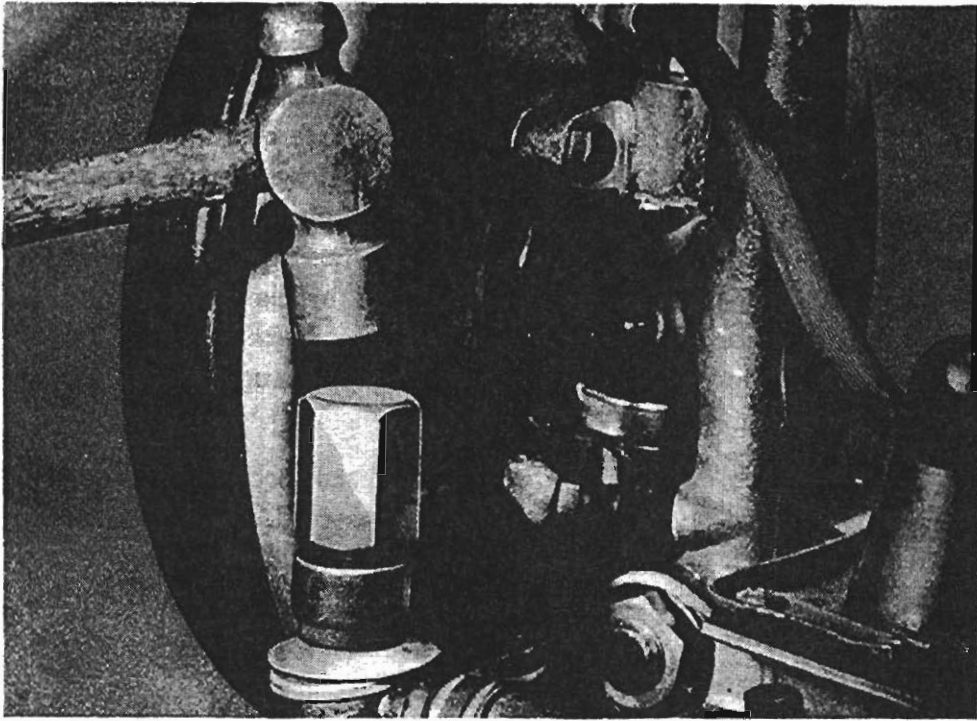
The Ball Stud May Be Knocked Out of the Steering Knuckle Lever Using the Remover HM844-C.
